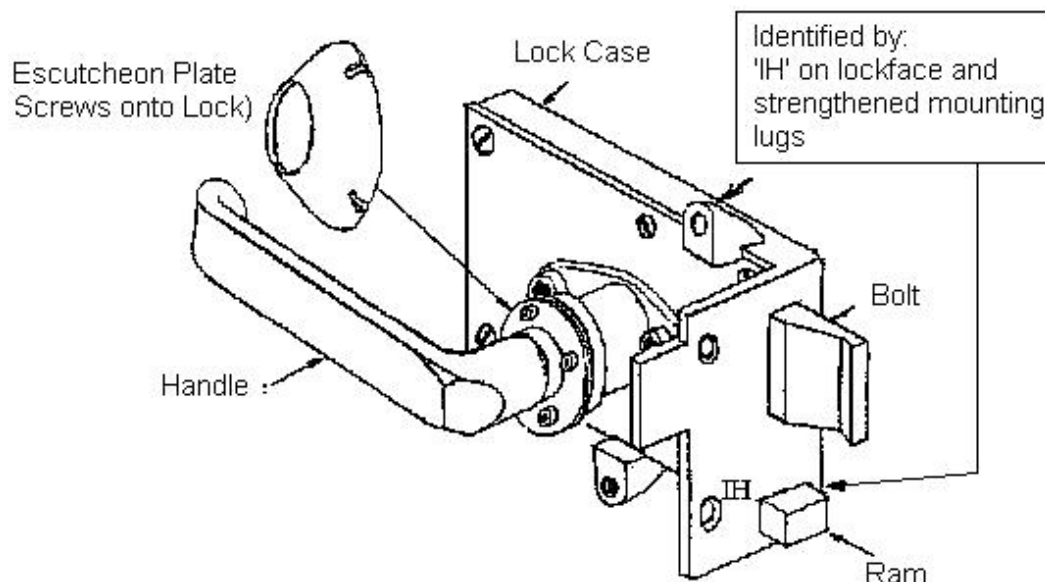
Mark 3 Coach Door Lock with Integral Handle
